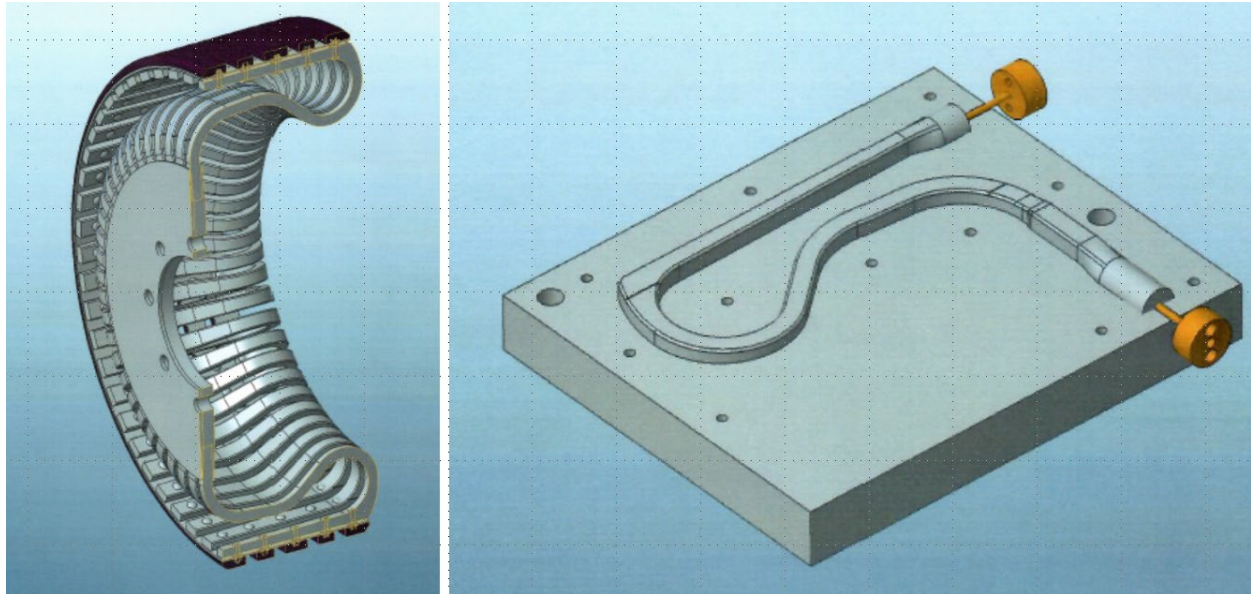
Initial setup to test the stresses of the spokes in the planned construction, as used by ETU. From a presentation at the first meeting of WP5.
